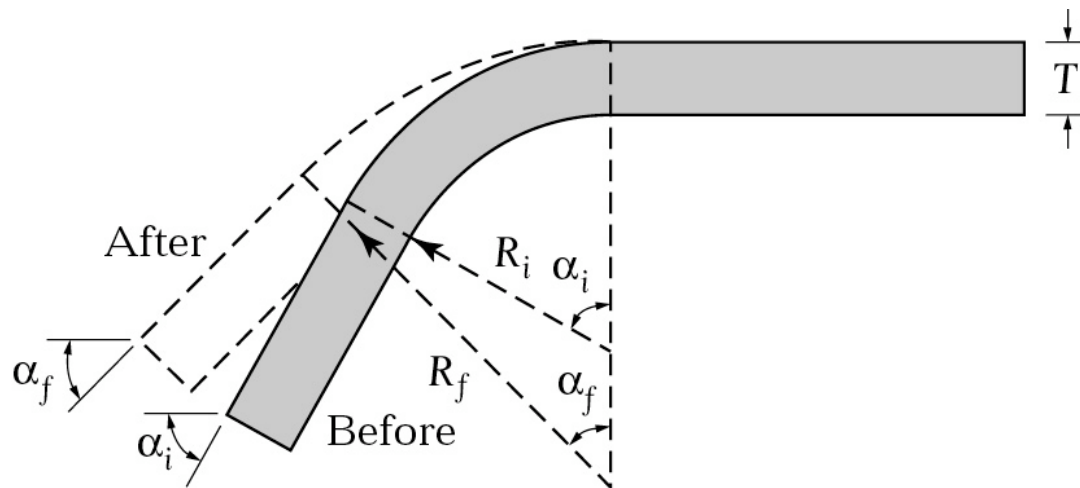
Springback in bending. The part tends to recover elastically after ending, and its bend radius becomes larger. Under certain conditions, it is possible for the final bend angle to be smaller than the original angle (negative springback).
